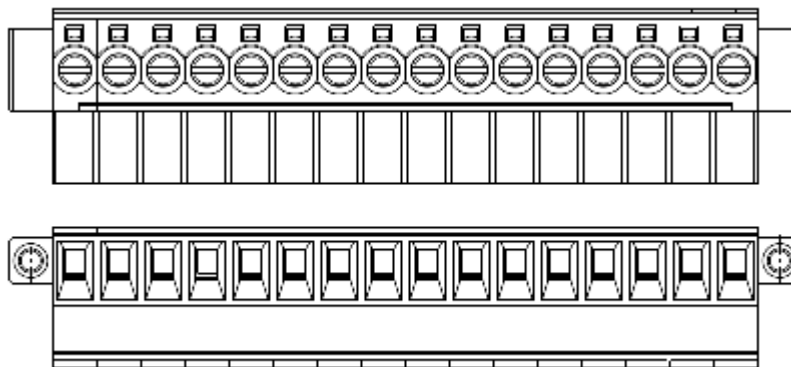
16-pin process terminal (type 360° for cabinet surface mounting)
